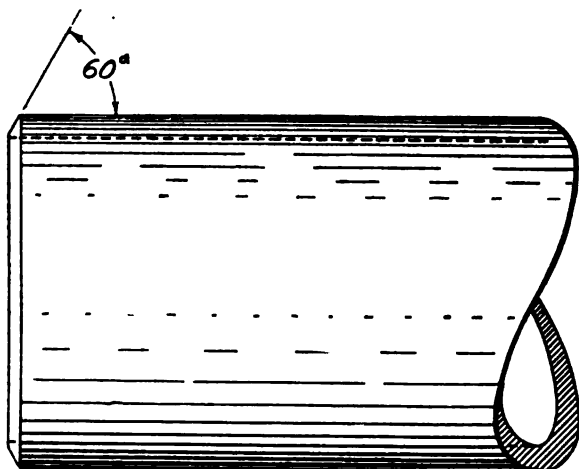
PROPER CHAMFER FOR THE END OF GAS PIPE
